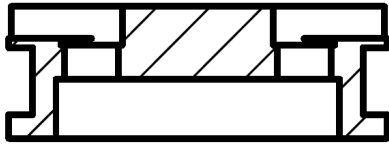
Cross-sectional view of the new sample holder (not to scale)
